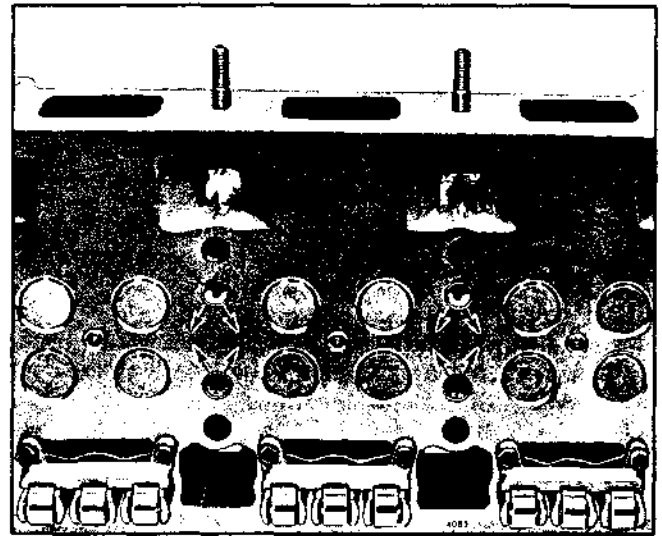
Correct Installation of Water Nozzles in Four-Valve Cylinder Head
